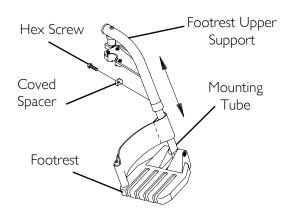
Adjusting Footrest Height - 60°, 70° and 90° Taper
